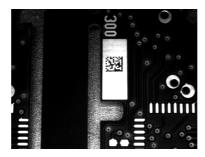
Dot Matrix Code Directly Marked on PCB Copper Pad by Using Ink-Jet Technology
